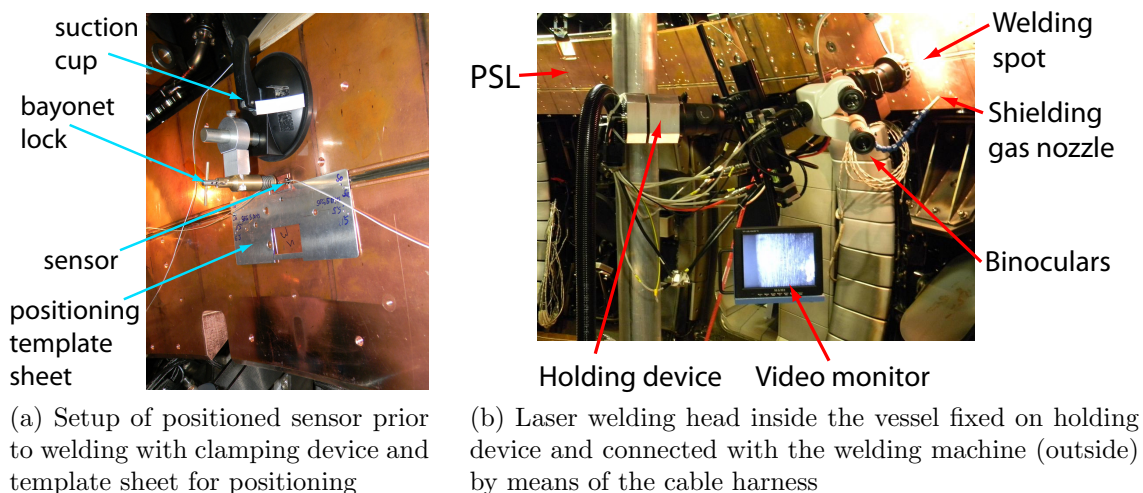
Sensor positioning and welding setup in the vacuum vessel
